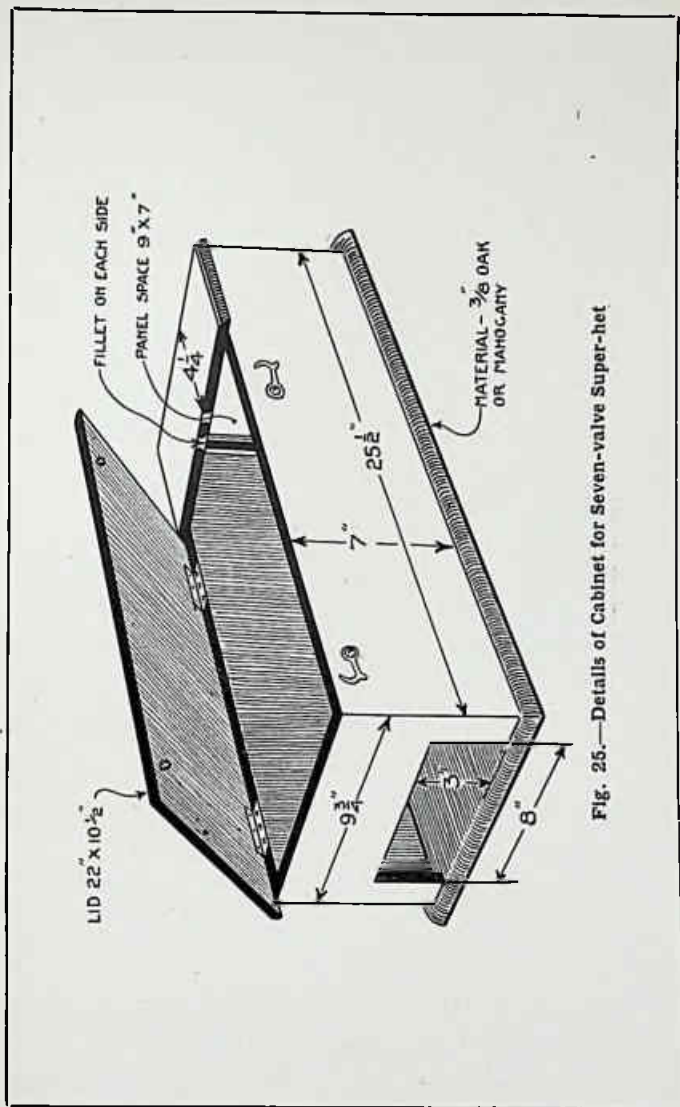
Details of Cabinet for Seven-valve Super-het
